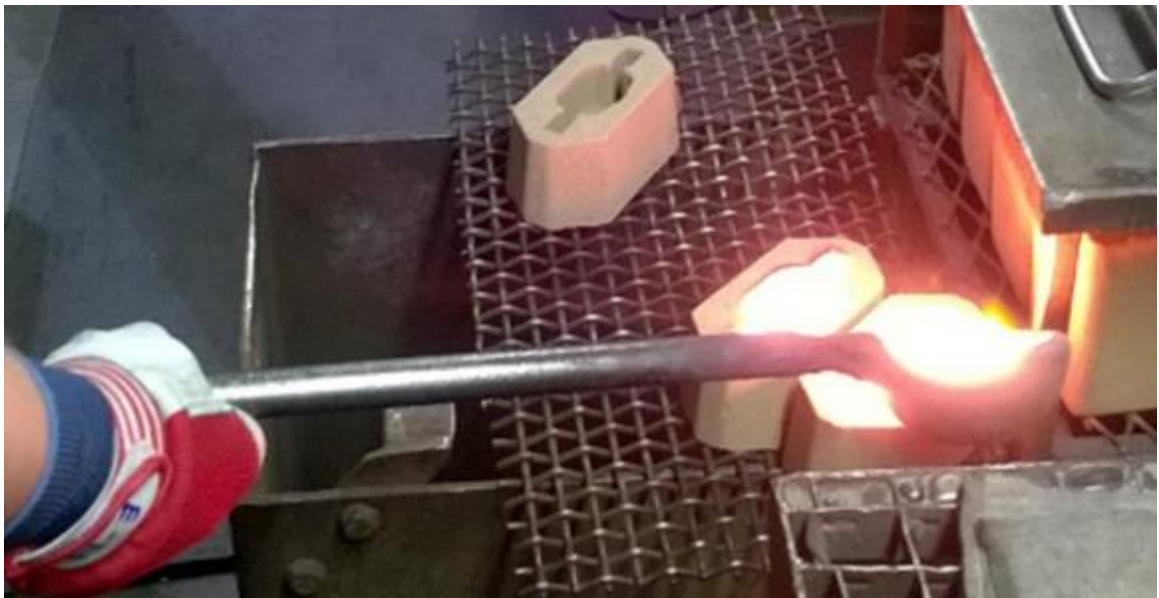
Pouring of laser engraved sand core moulds with molten ductile iron at Componenta Högfors foundry.
